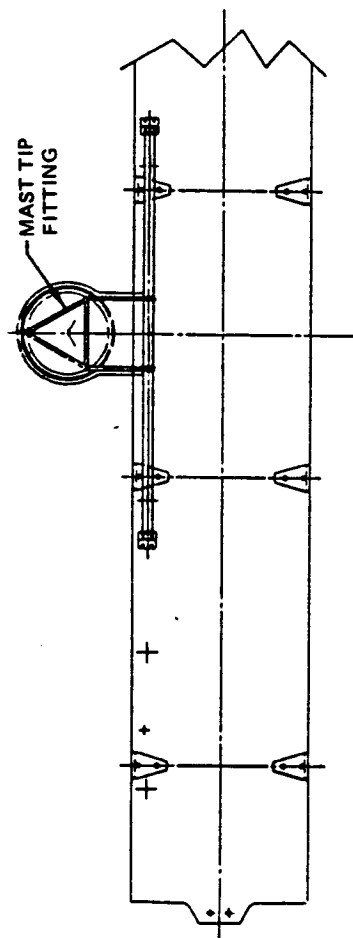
Attachment of Blanket Housing Assembly to Mast System
